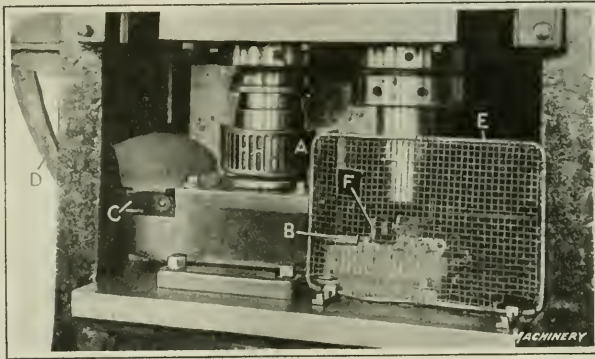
Guard for a Double-action Press employed for Blanking, Drawing and Redrawing Operations
